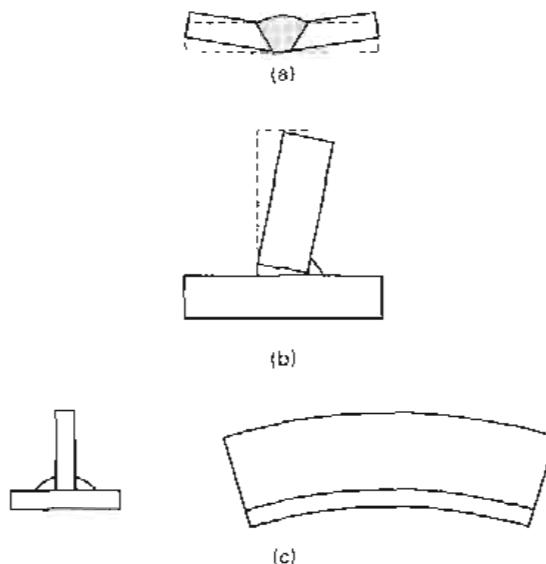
Distortions or warpage that may occur as a result of welding operations: (a) V-groove butt weld where the top of the joint contracts more than the bottom; (b) one-side fillet weld in a T-joint; (c) two-fillet weld in a T-joint with a high vertical web.
